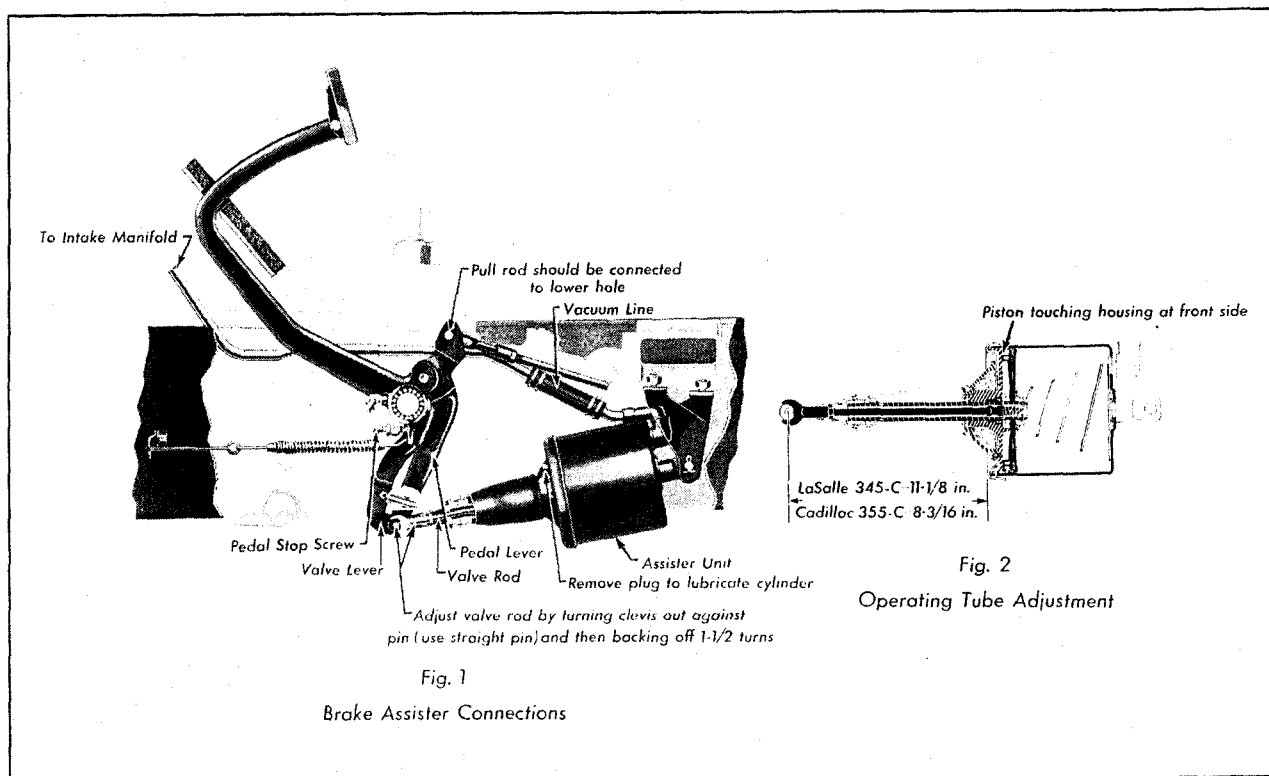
B. Brake Assister Adjustments—Cadillac 355-C—LaSalle 345-C
